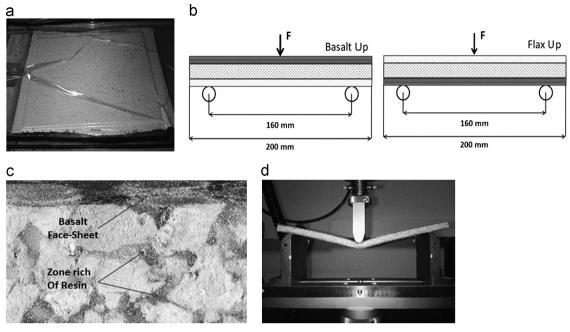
(a) Bagging process, (b) test configurations, (c) resin infiltration inside core and (d) specimen during bending test.
